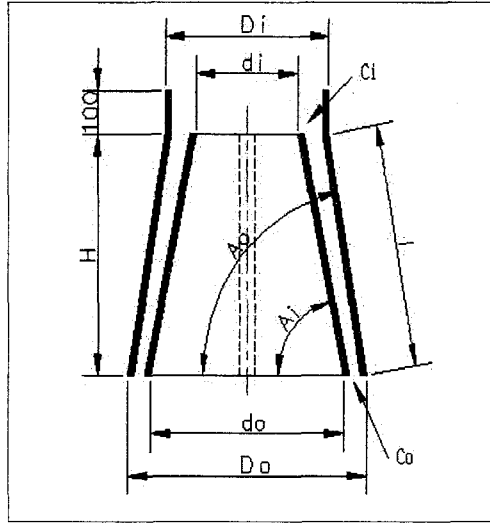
Sectional view of rotating inner and fixed outer cones
